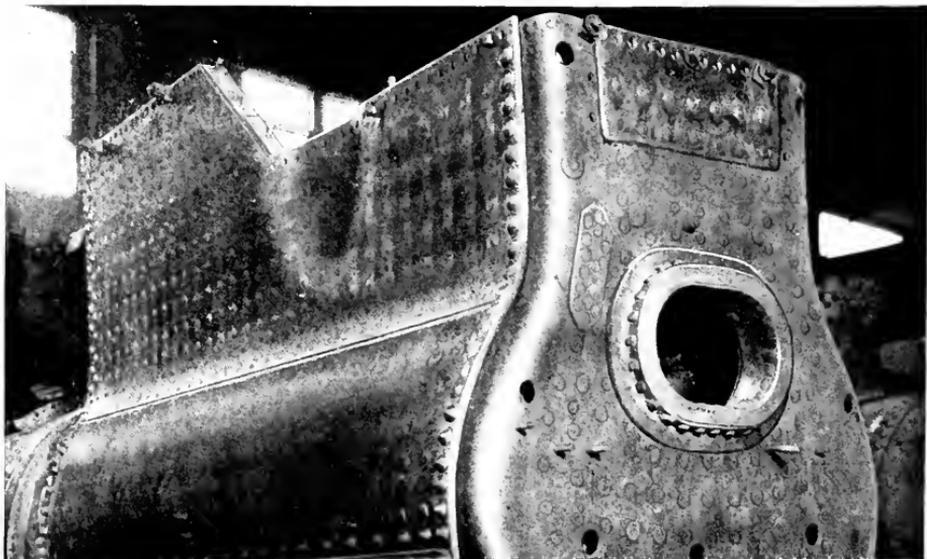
Locomotive Boiler Being Changed to Stationary Type. New Half Side Sheets and Patch in Door Sheet; Work Done by Electric Arc Welding
